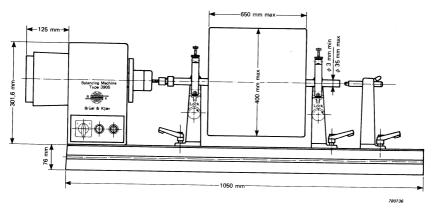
Type 3905 Balancing Machine. Maximum rotor dimensions in mm
